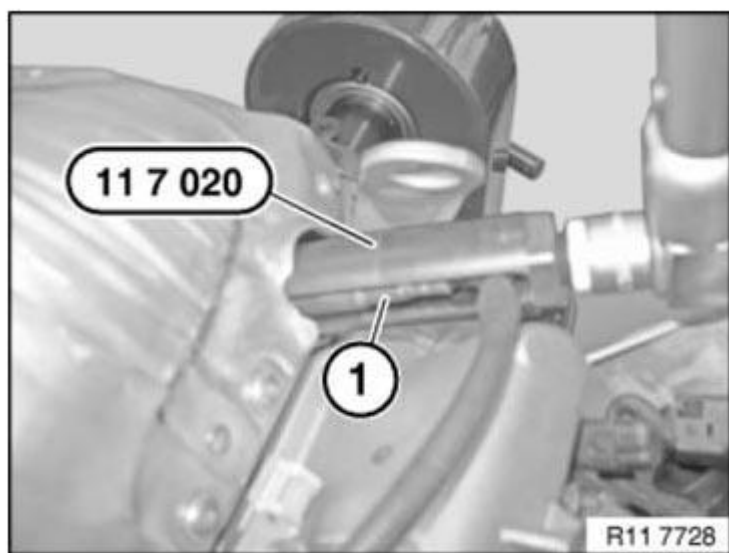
Releasing Monitoring Sensor Using Special Tool 11 7 020
